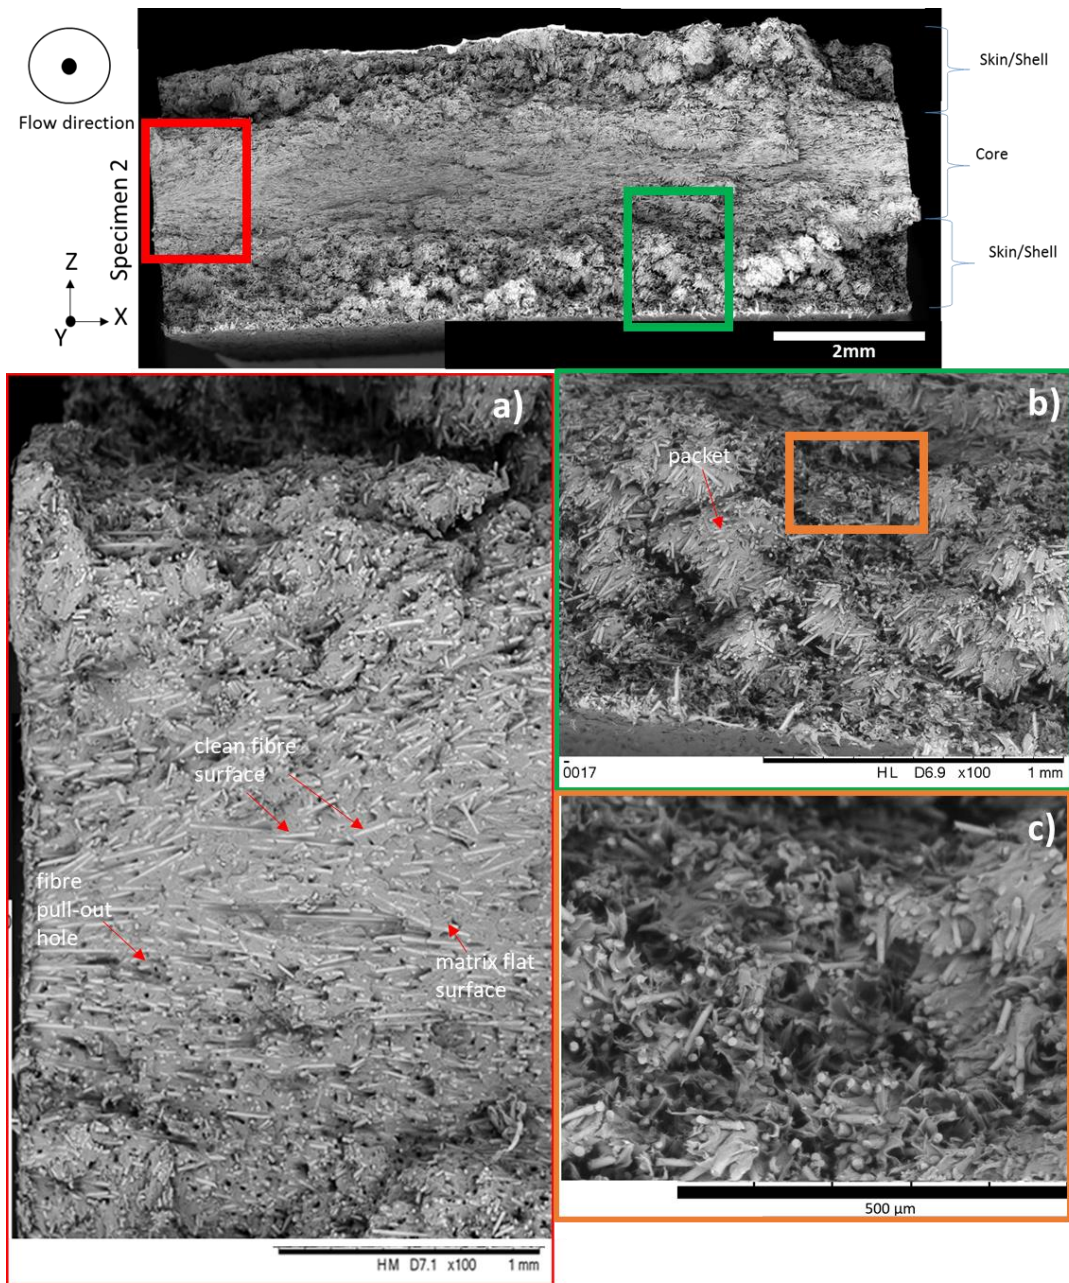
Fracture surface of 0° reference specimen 2 tested in fatigue R=-1 and close-up images. $V_f=30\%$.
